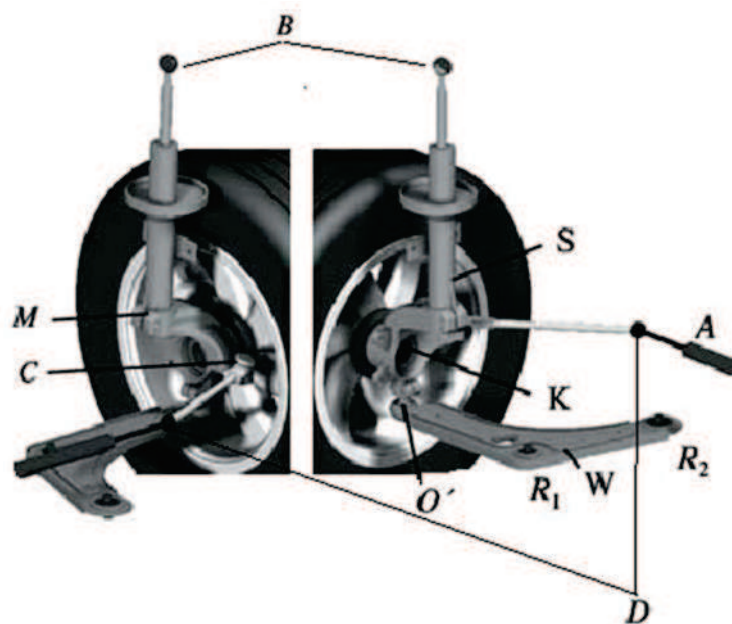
The McPherson suspension elements for the right front wheel. A - steering rack-body translational joint, B - body - strut spherical joint, C - steering tie rod-strut-knuckle spherical joint, D - steering rod-rod-rod steering rack spherical joint, K - knuckle, M - damper tube, O' - wishbone-strut-knuckle spherical joint, R₁ - bushing, R₂ - bushing, S - strut, W - wishbone
